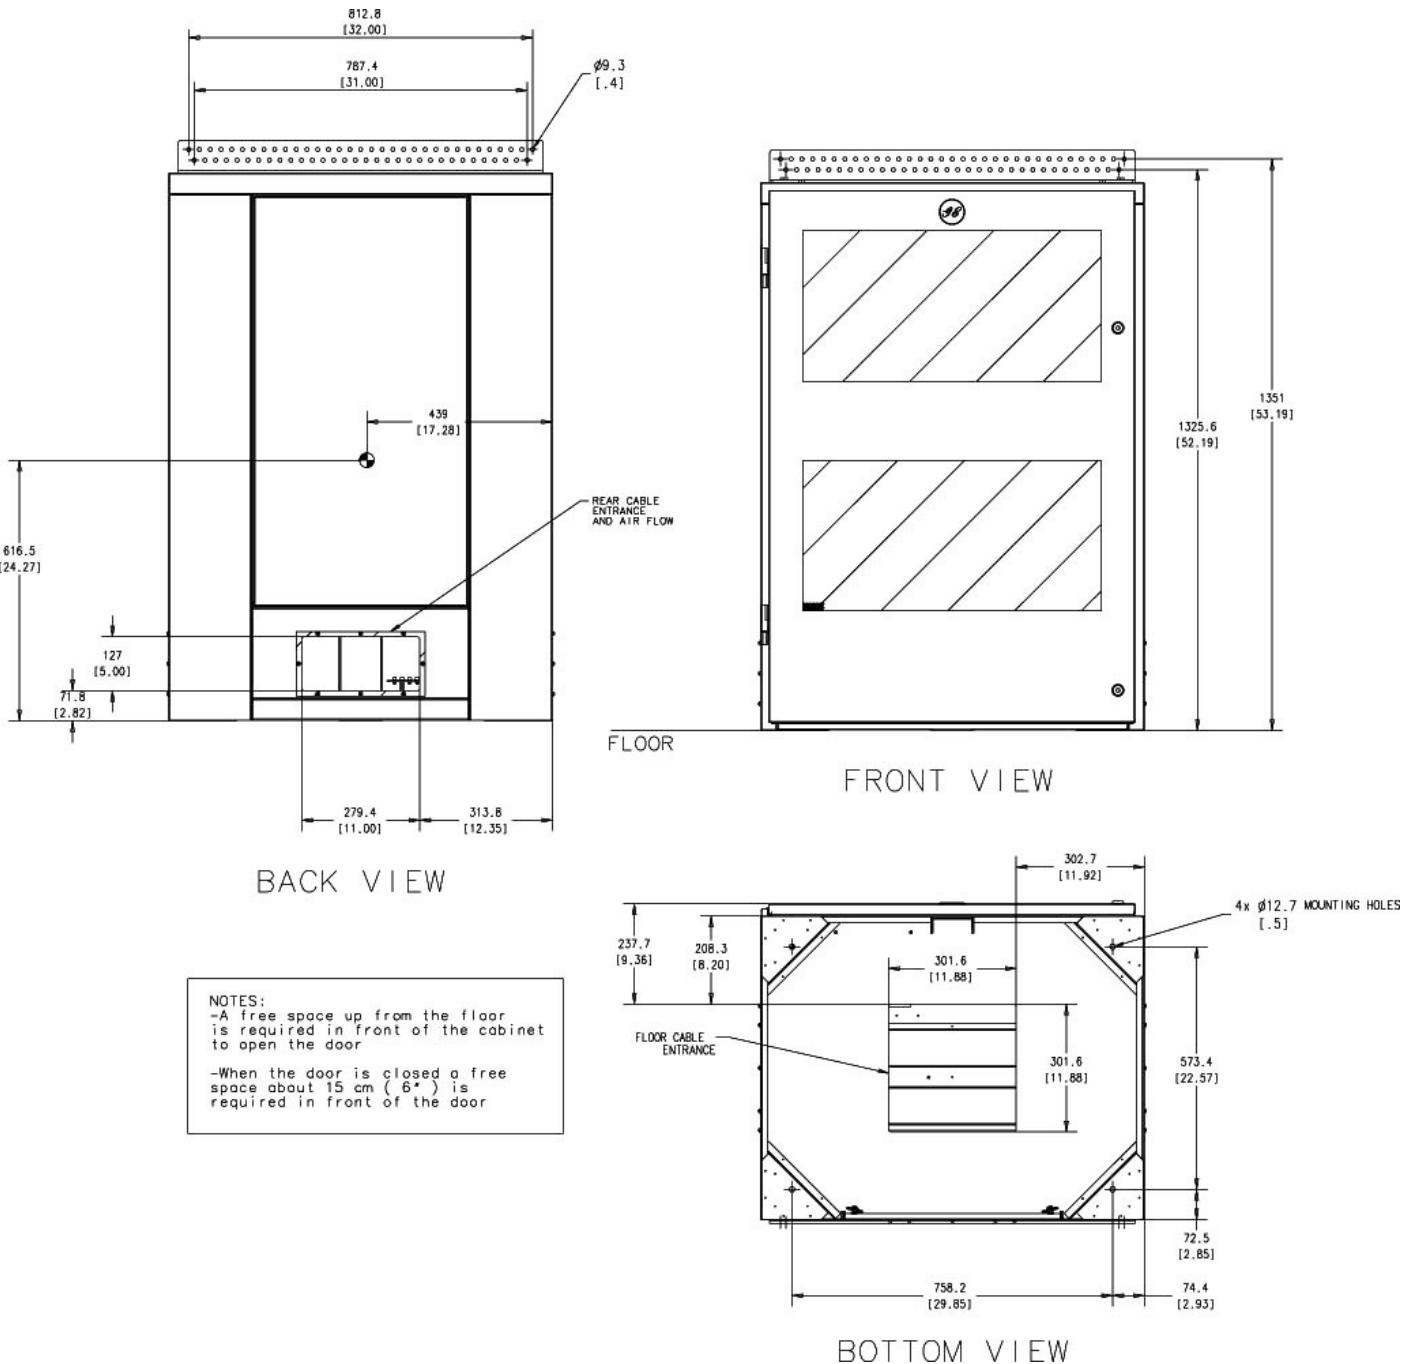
System Cabinet Dimensions (Front, Bottom, Back)
